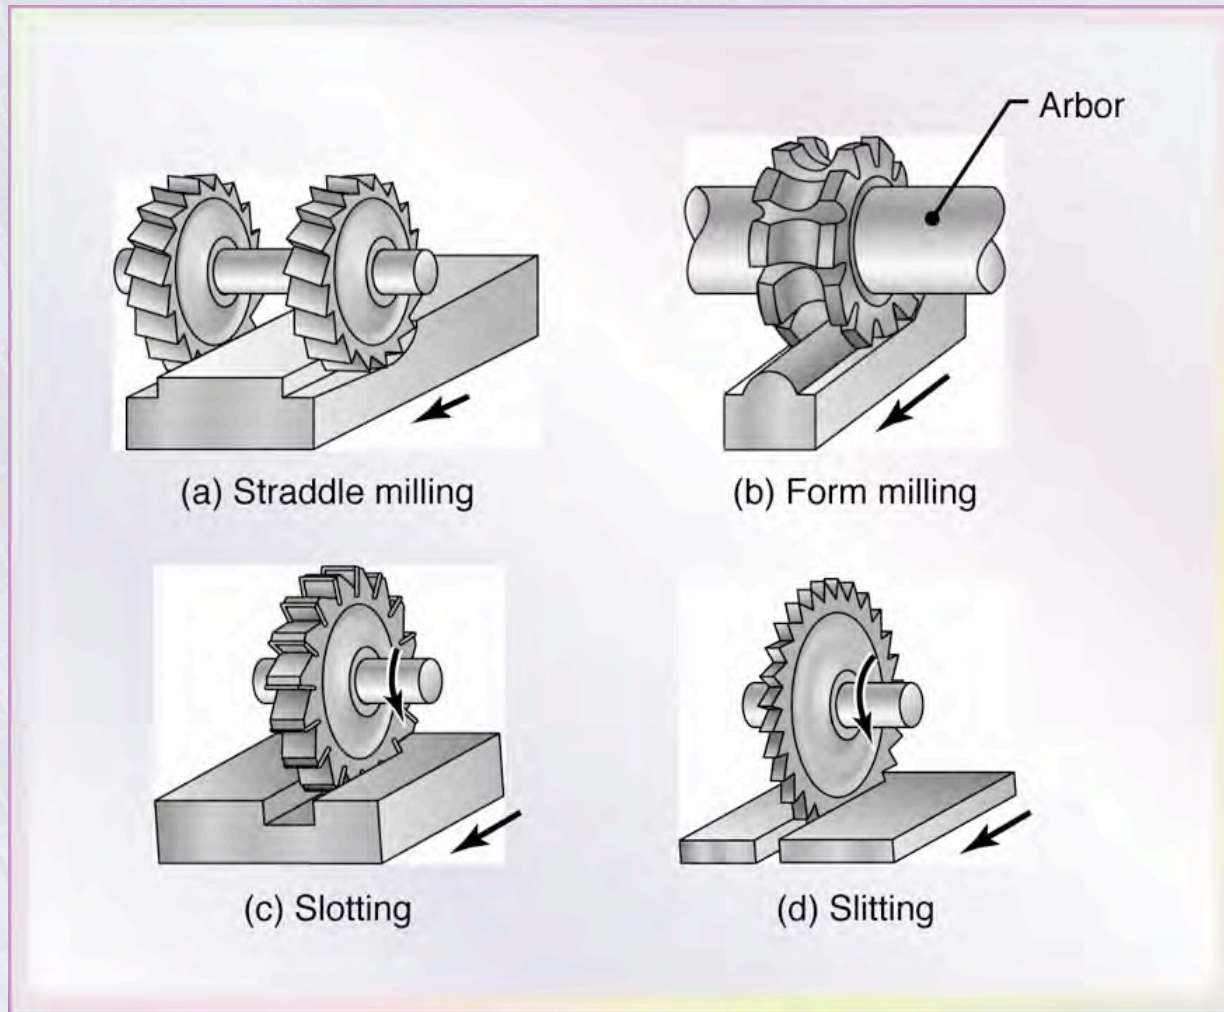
Cutters for (a) straddle milling, (b) form milling, (c) slotting, and (d) slitting with a milling cutter.
